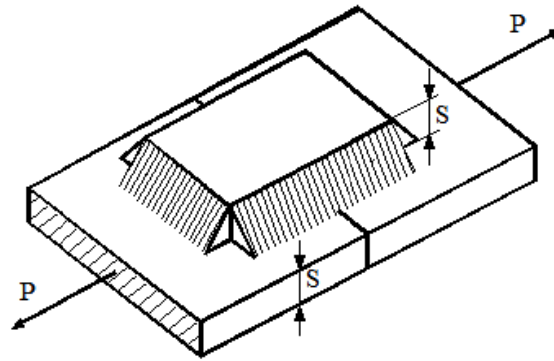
Longitudinal and transverse fillet welding joint.
